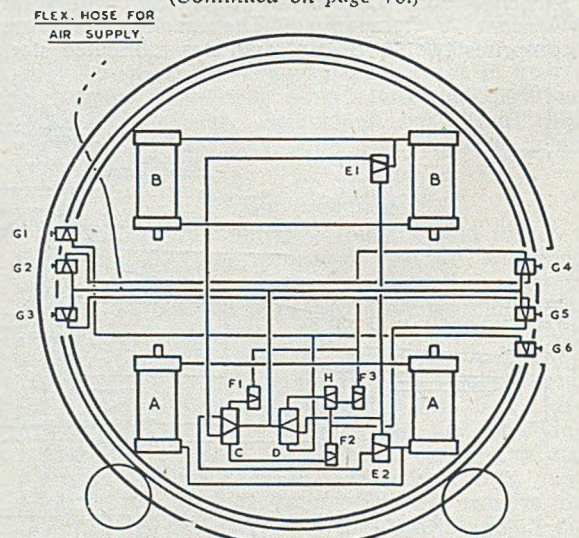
Diagram of the Control System for the Mould-turnover Machine.
